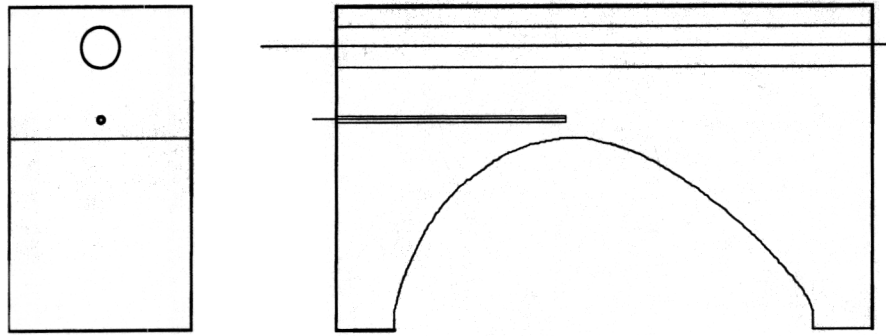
Copper block with geometry of leading edge formed by wire electrical discharge machining. The large-diameter hole accepts a cartridge heater, and a type K thermocouple is inserted in the smaller hole.
